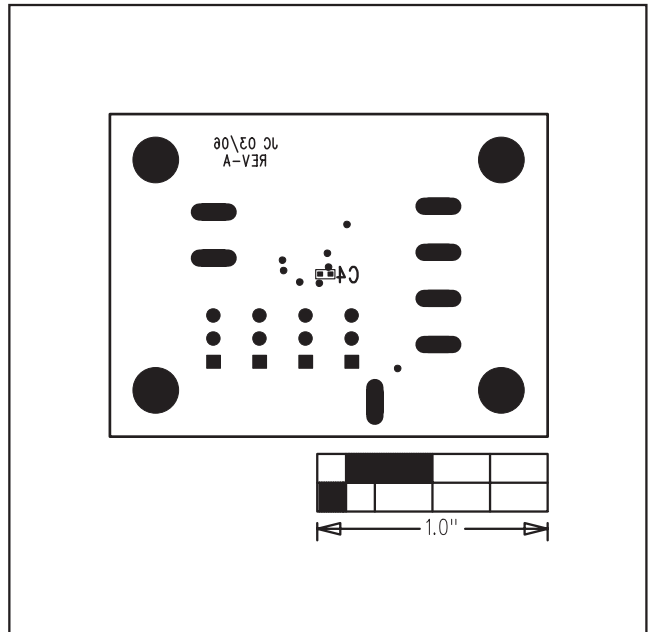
MAX8633 EV Kit Component Placement Guide—Solder Side
